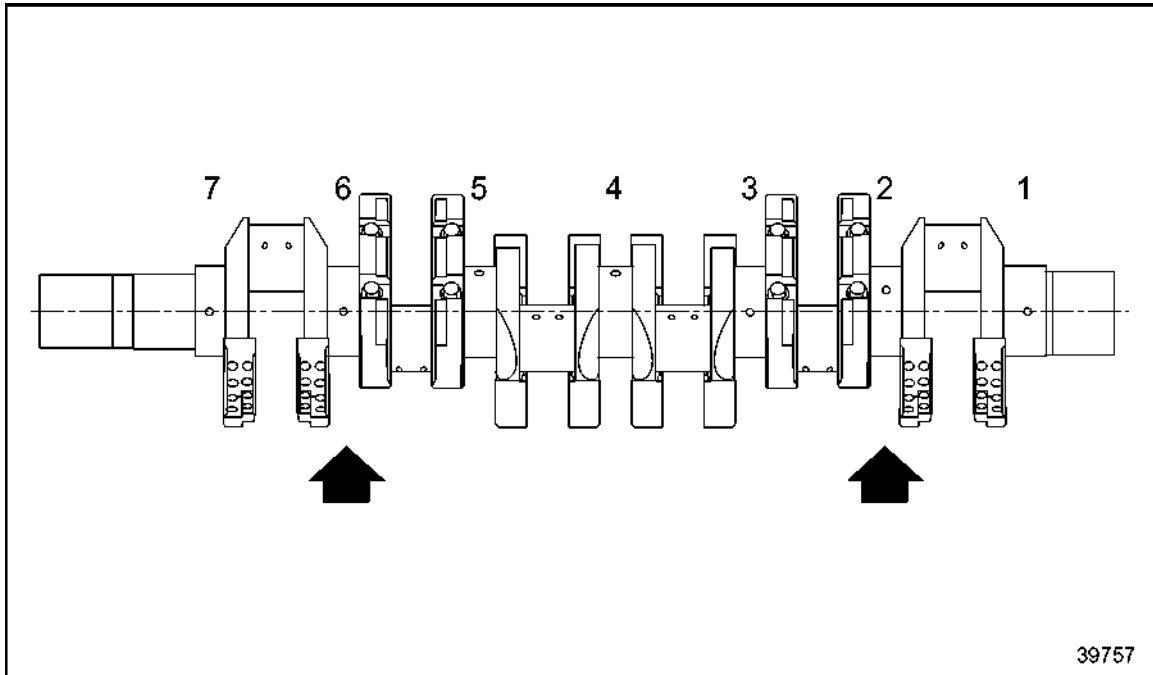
Coaxial Tolerance of Crankshaft Main Bearing Journals
